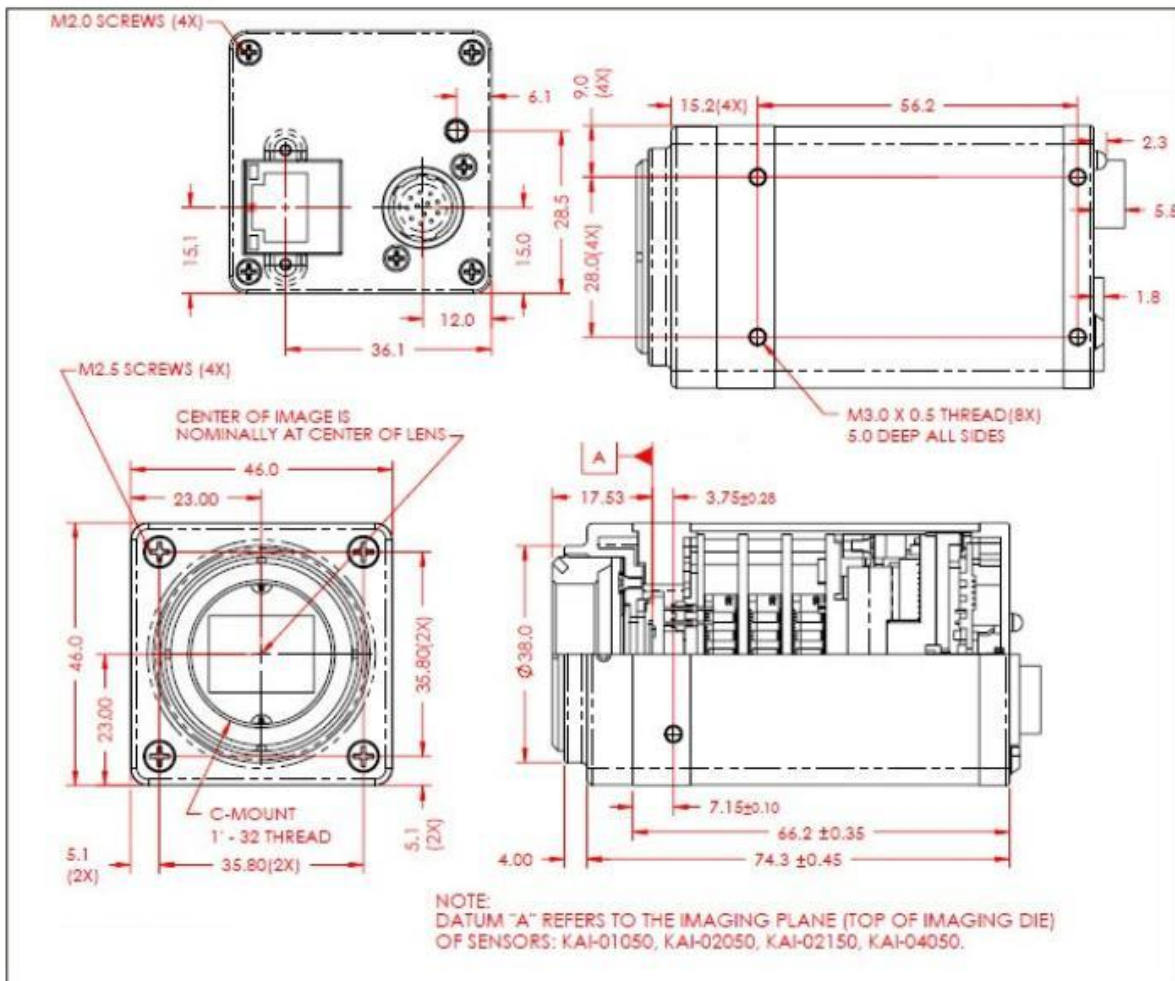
a – C-mount GigE vision output – dimensional drawings for IGV-B1020, B1320, B1621, B1921 and IGV-B2320.
